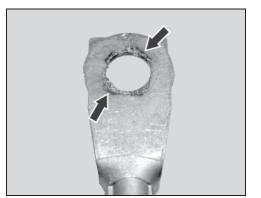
P-B-54.18/108 Arrows pitting on starter cable harness lug.
